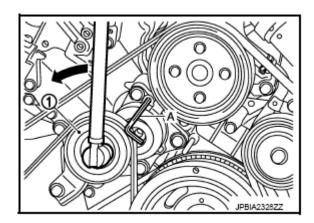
Locking Auto Tensioner Pulley Arm Courtesy of NISSAN NORTH AMERICA, INC.
